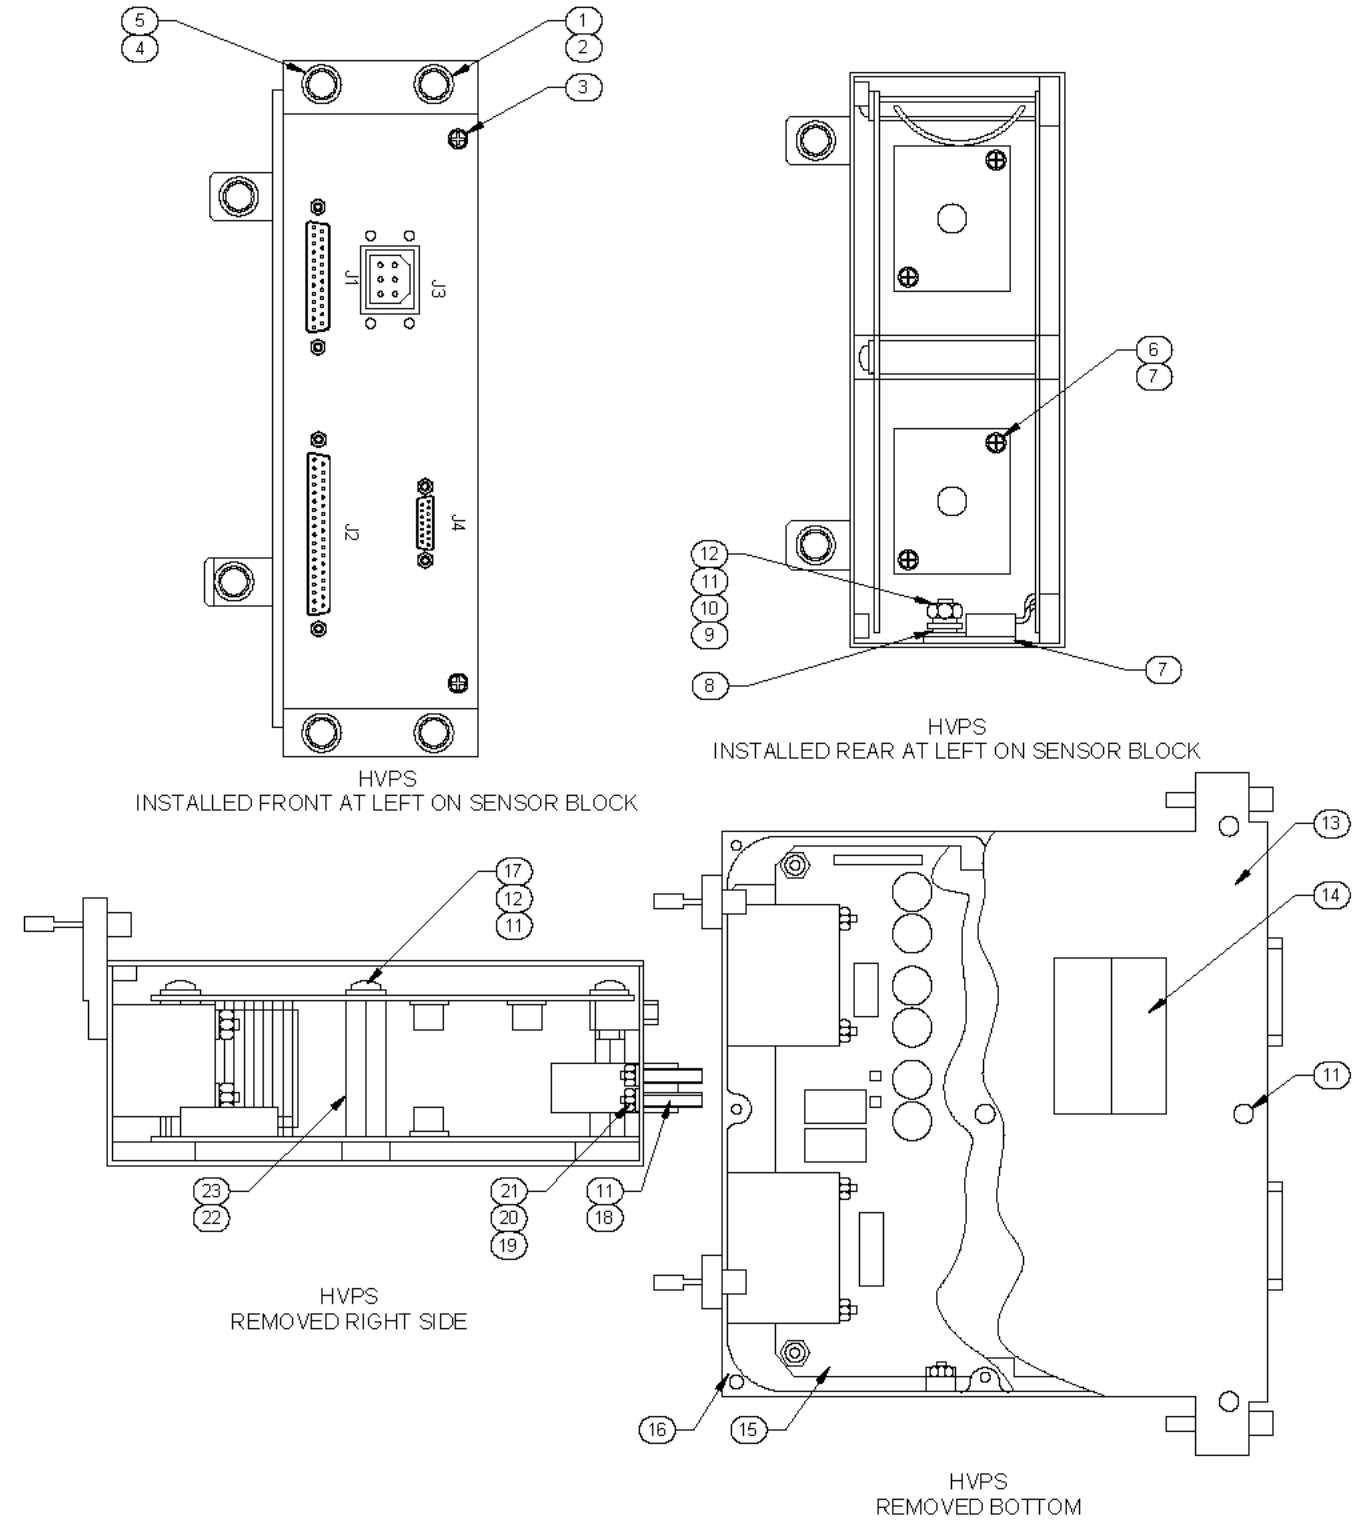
High Voltage Power Supply Assembly (1A2A1A1A4)
